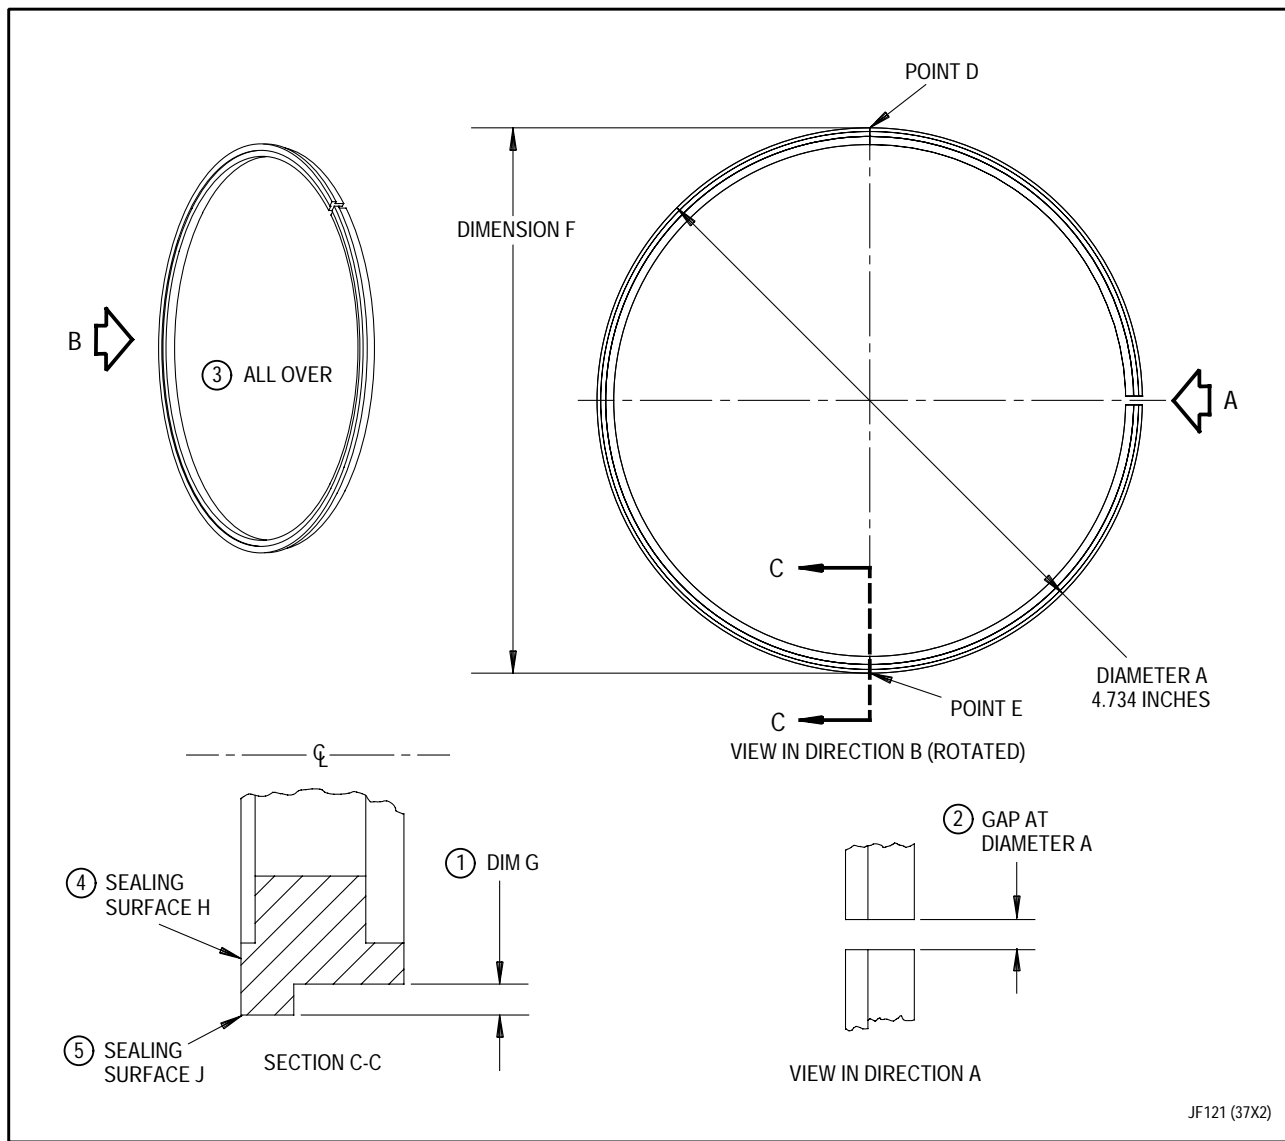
Metal Seal Ring (No. 1 Bearing Seal Sealing Ring) - Inspection
